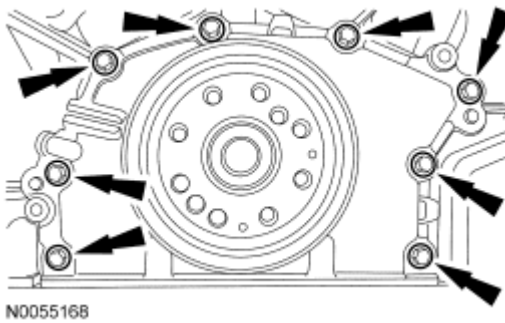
Locating Crankshaft Rear Seal Retainer Bolts
